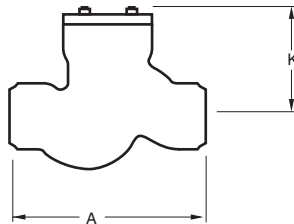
WE* Butt Weld Ends
